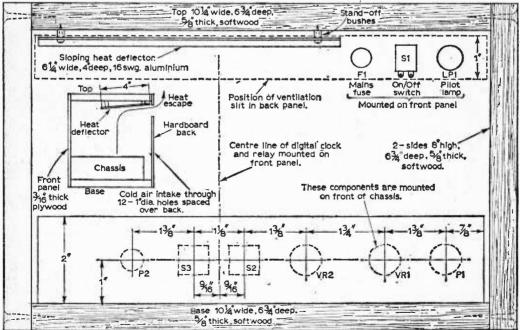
Back view of cabinet with the chassis in position. The panel drilling must mate with the chassis front flap drilling so that the components concerned clamp the chassis and front panel together as one integral unit. Note the important ventilation measures indicated.
